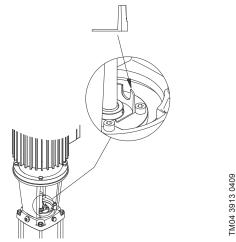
Coupling adjustment CR, CRN 32, 45, 64, 90, 120, and 150
